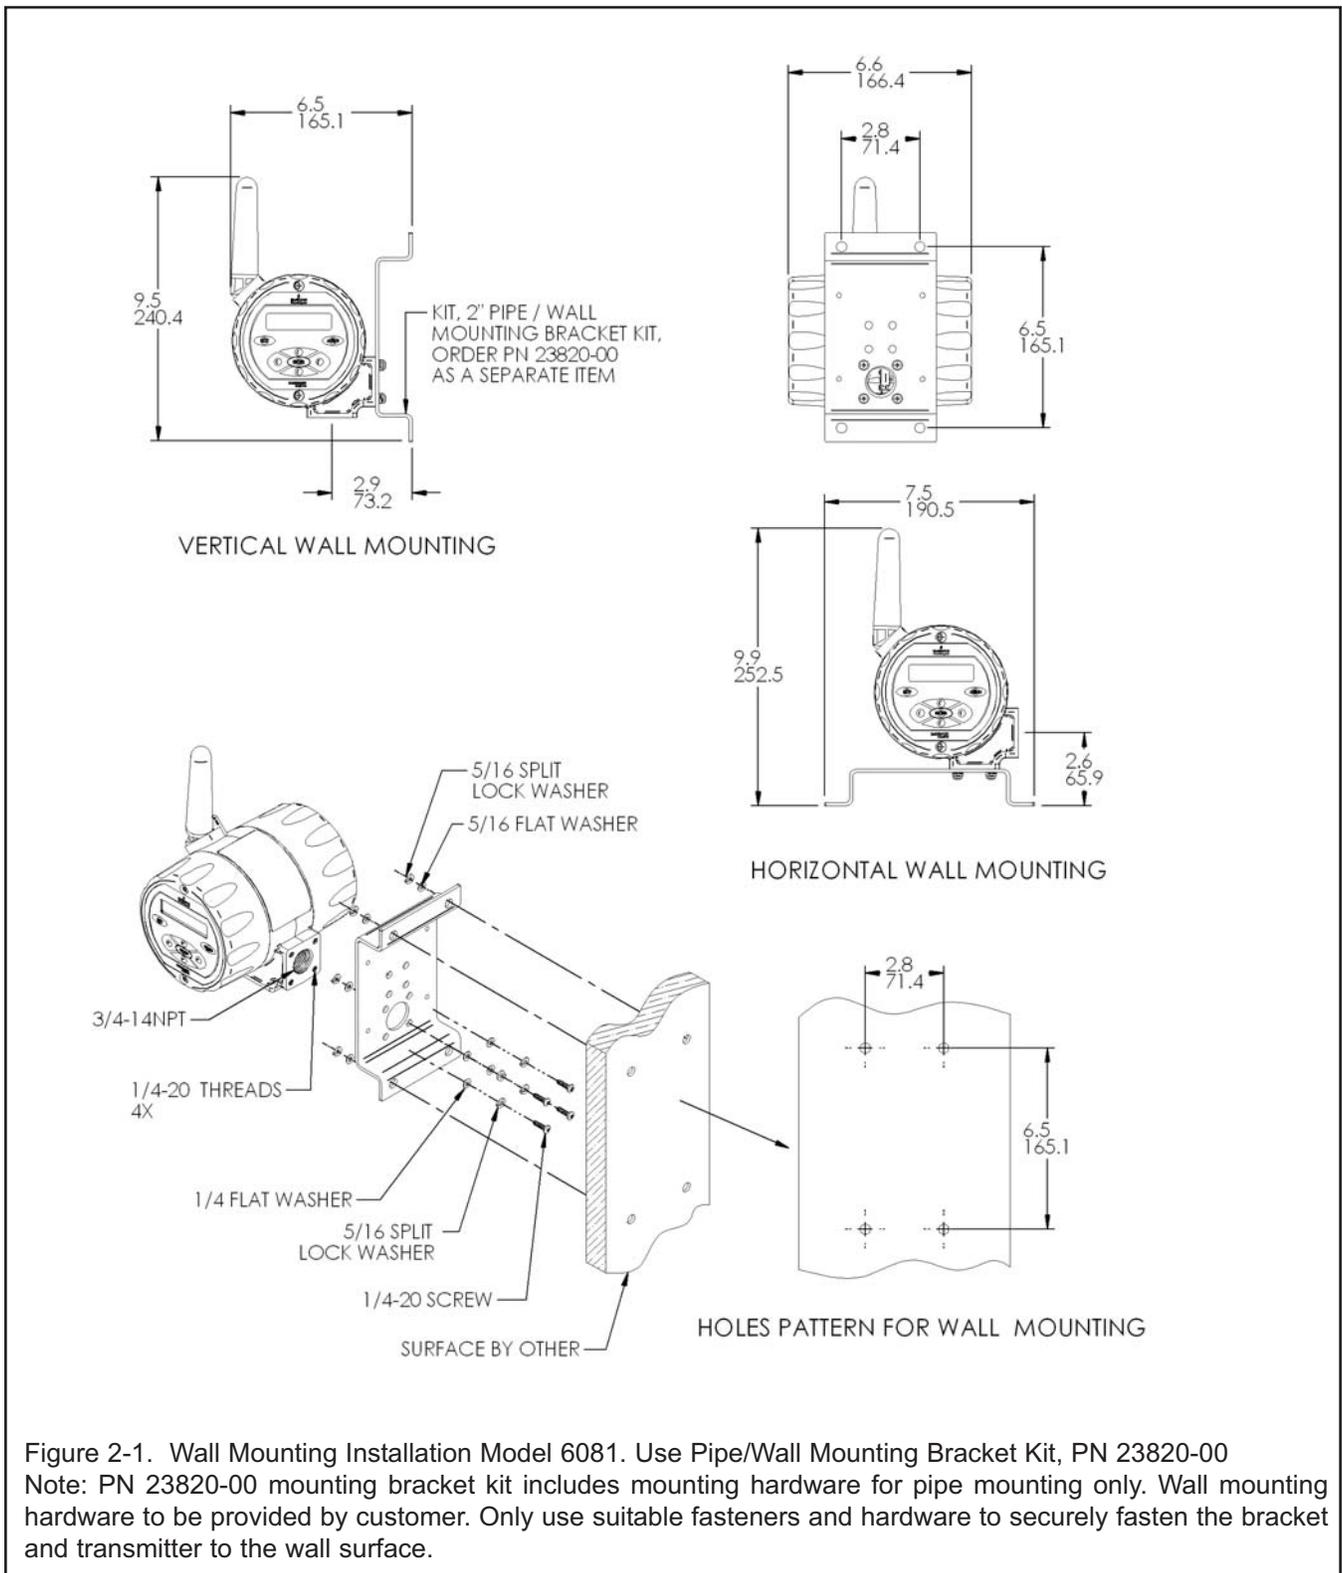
Wall Mounting Installation Model 6081. Use Pipe/Wall Mounting Bracket Kit, PN 23820-00
